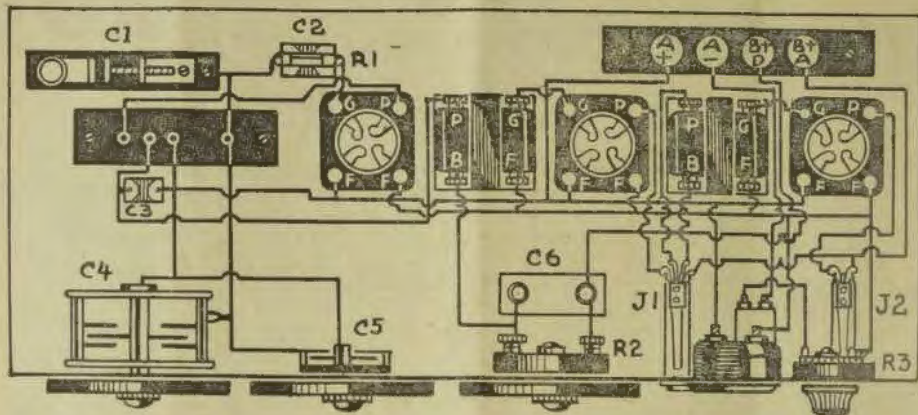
, Method of assembly of open model. Draw in order, Fig. 3 and 4.
